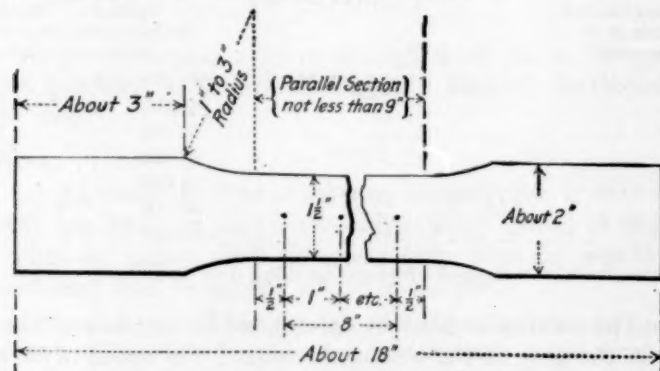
Standard 8-in. Gage Length Test Specimen.
